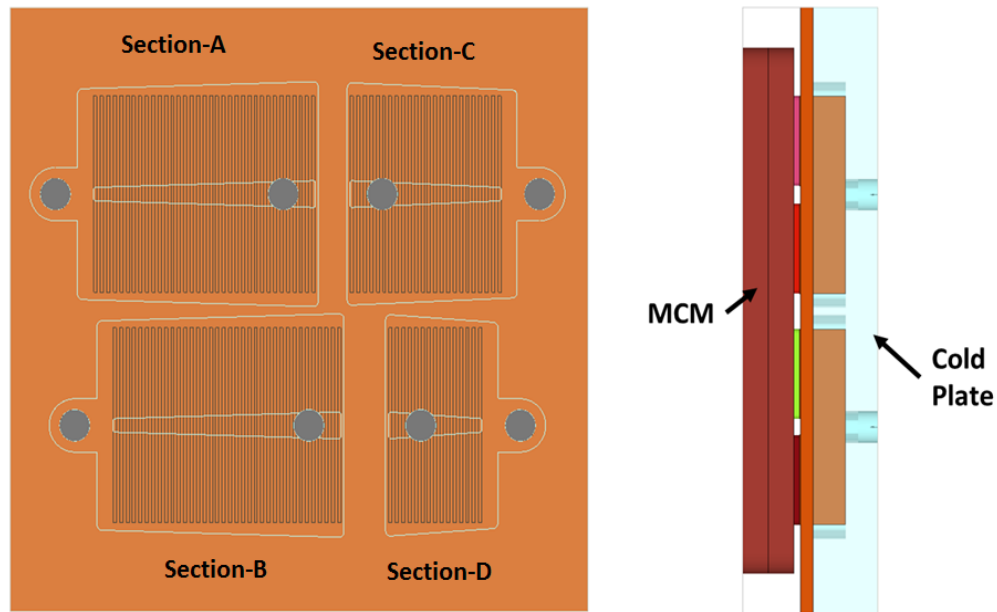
shows the trapezoidal flow guide and, the side view of assembly.
